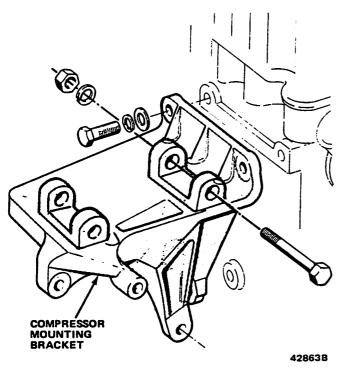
E-18 Compressor Mounting—Six-Cylinder Engine
